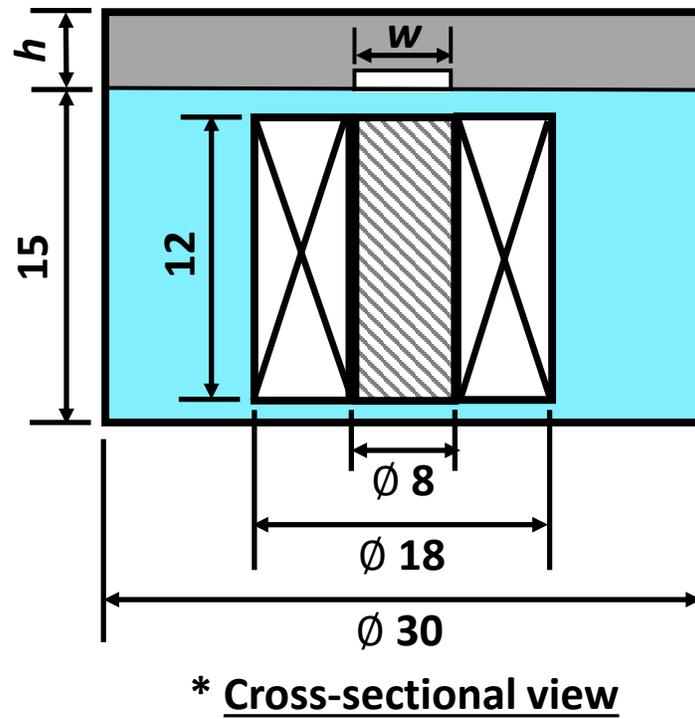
The detailed dimensions of the MRE valves presented, h and w are the adjustable parameters investigated in this work.
